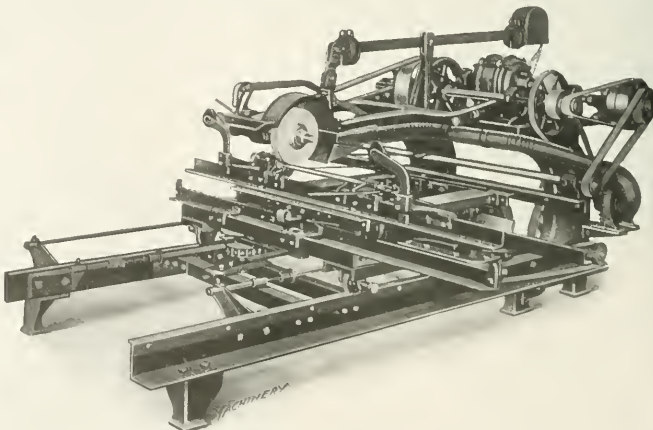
Excelsior Automatic Grinding and Polishing Machine equipped with Pipe Grinding Attachment
